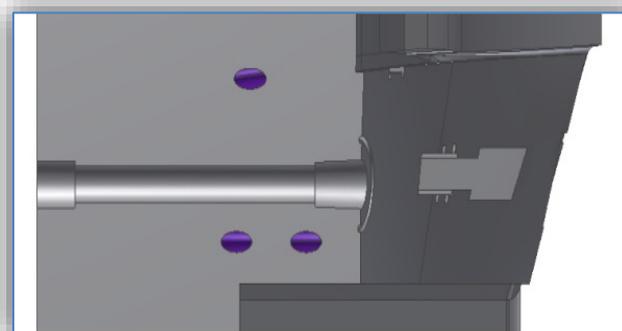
Cooling channels with elliptical cross-section in area of the mould inserts
